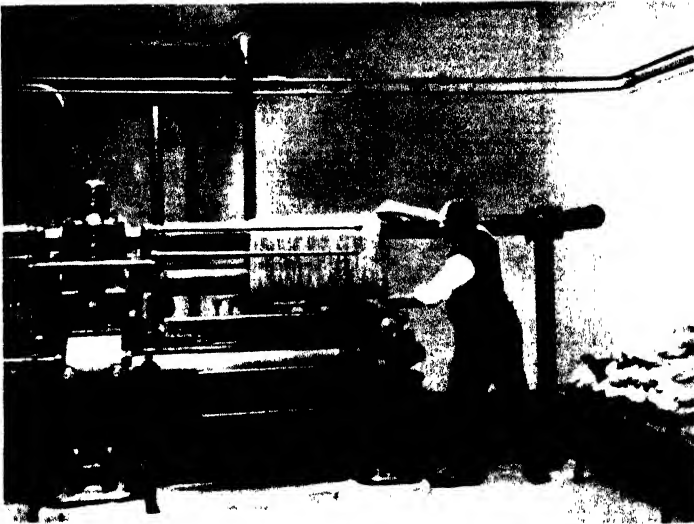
Sliding the hanks on to the Jaeggli machine
